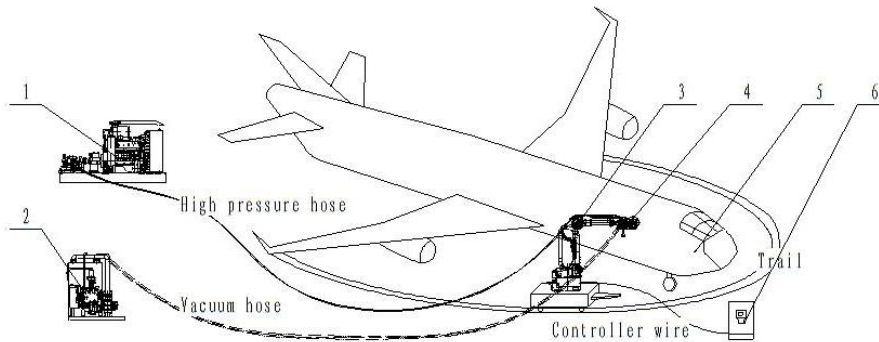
Ultra-high pressure water jetting paint removal equipment for airplane
